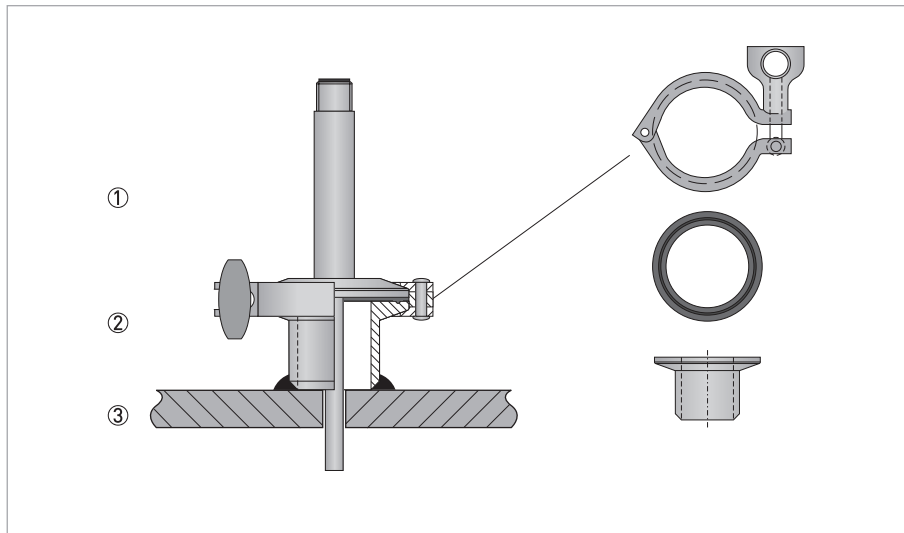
Installing a compact sensor with a ISO 2852 DN25/38 clamp
